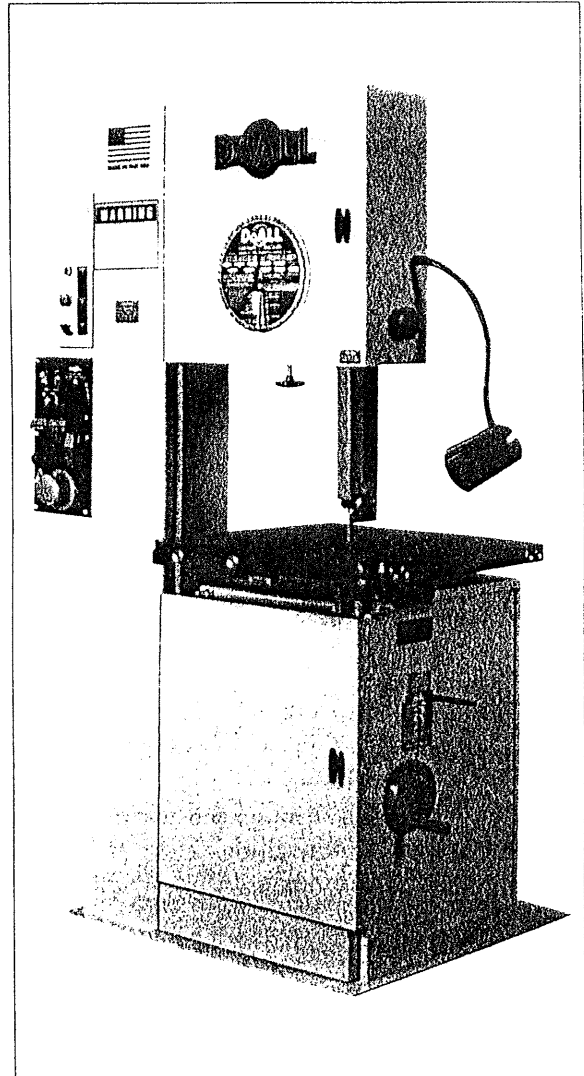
General-purpose contour band-sawing machine. (Courtesy ITS/DoAll Industrial Company)
